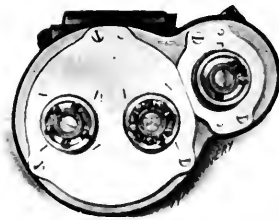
End View of Drill Head showing Arrangement of Spindles
